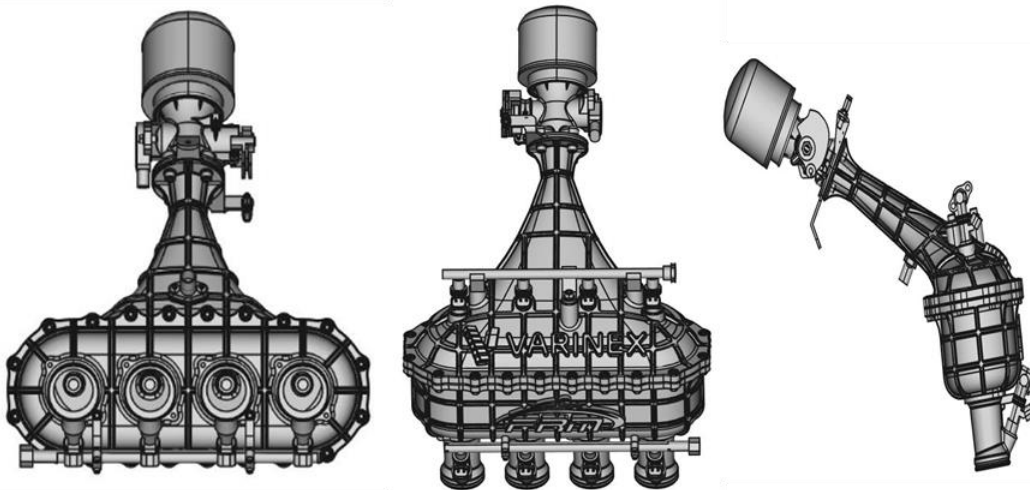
Honda engine Intake manifold 3D geometry along with restricted, primary injectors and secondary injectors.
